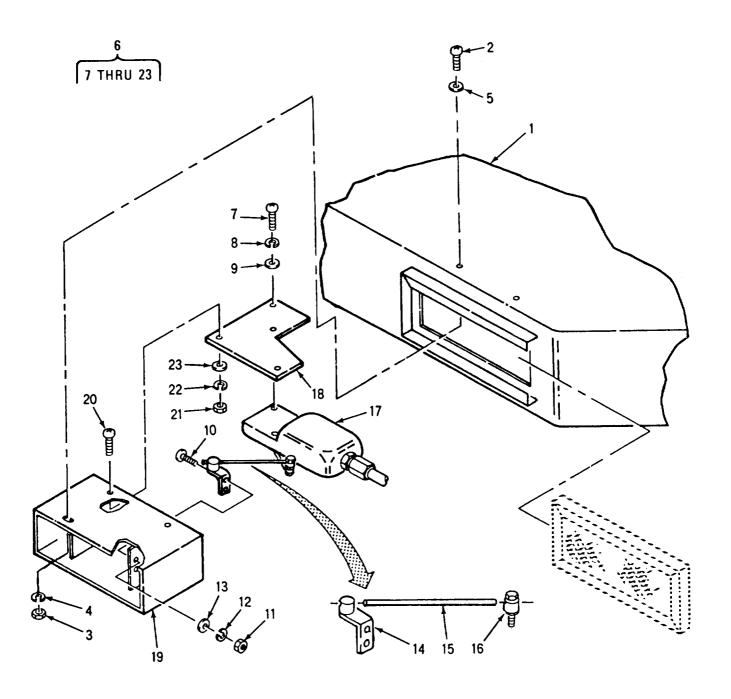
ECU Intake Damper Doors (Sheet 1 of 2)
